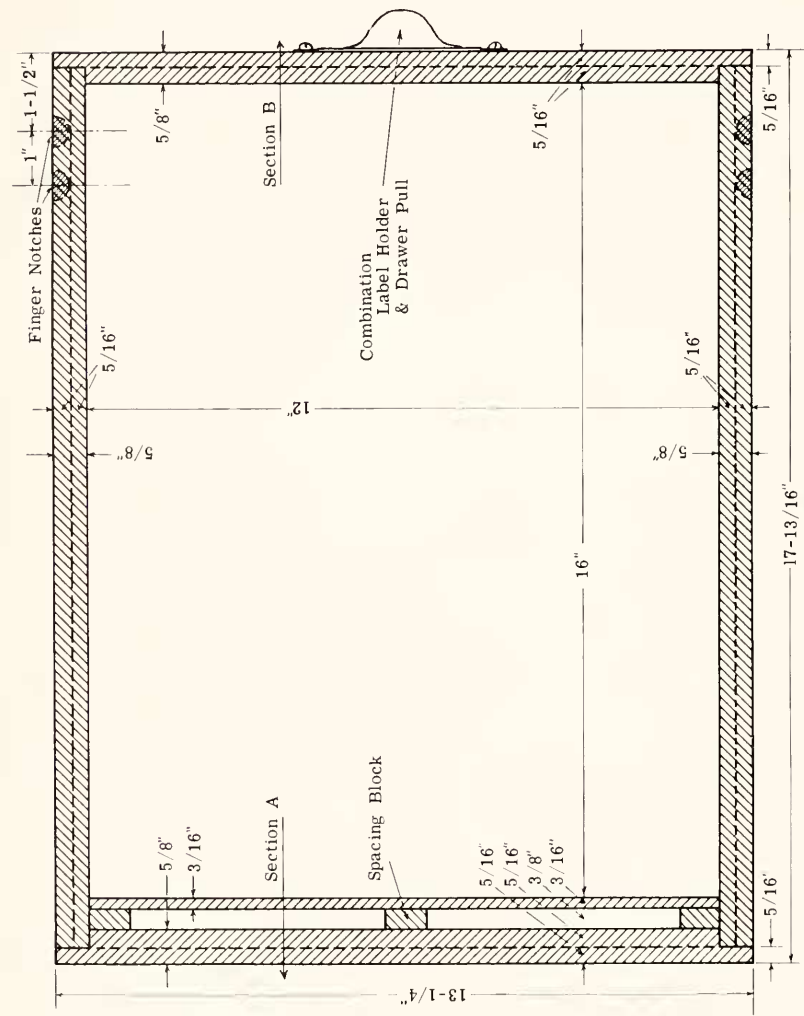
Insect drawer, top view. Sectional views A and B are shown in Figure 2.
